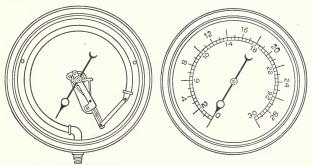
Interior Mechanism, and Dial, of Low-Pressure Steam Gauge.
